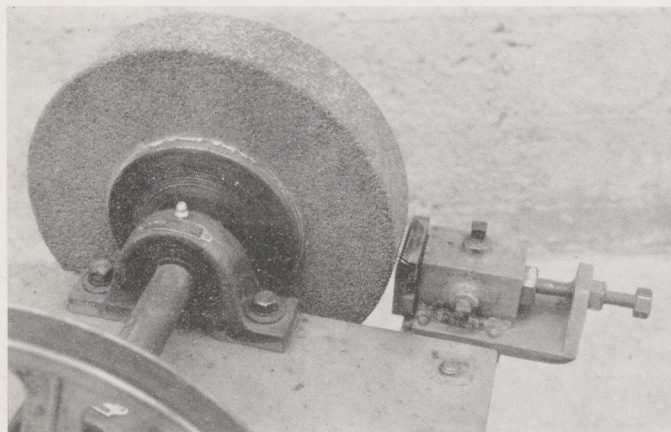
Close-up of abrasive wheel and adjustable shear bar.
